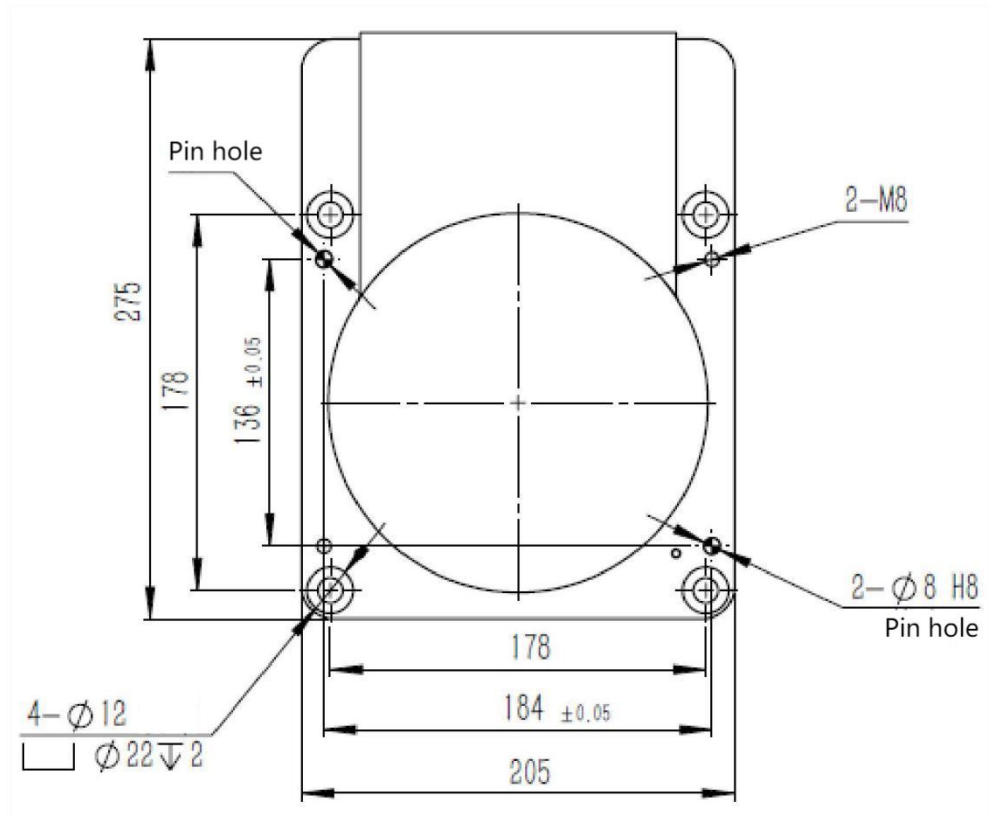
Base dimensions of H10-1500 and H16-1200
